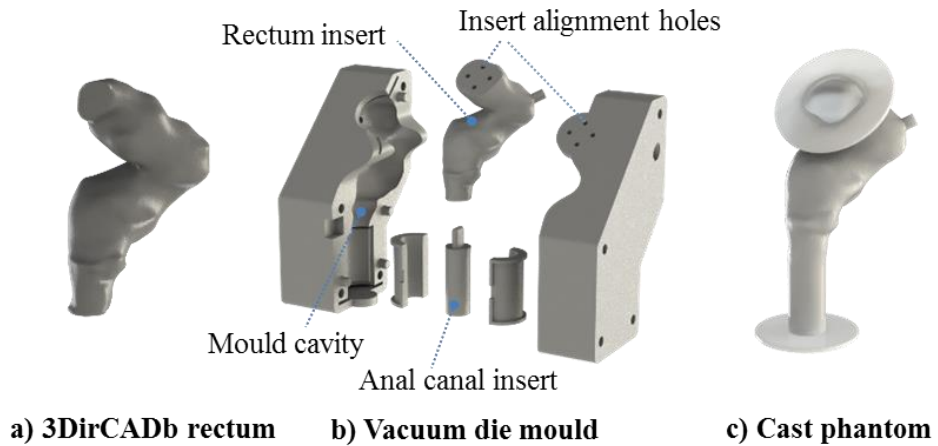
Fabrication process for the rectum phantom model detailing a) the segmented geometry b) exploded view of the 3D printed vacuum injection mould and c) cast phantom rectum Phantom.
